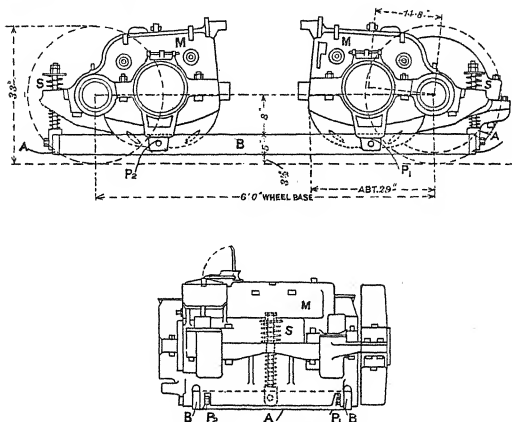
Baldwin-Westinghouse cradle suspension for motors.
